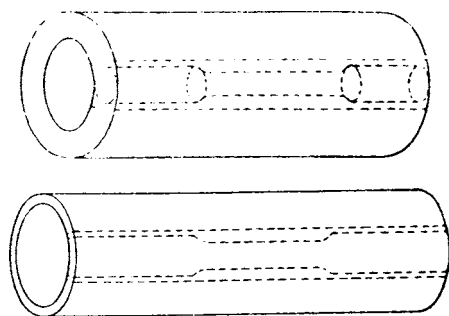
Squeezing Jig for Flattening Ends of Full-Size Tension Test Specimens
